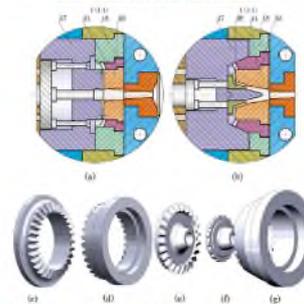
Local sections of the mold forming knot: (a), (b) - for the manufacture of fixed and movable central wheels of the 2K-H precessional gear respectively; (c), (d) - 3D views of fixed center wheel and mirror profile die; (e), (f), (g) - respectively the views of the central movable wheel, the reinforcement and the mold with mirror profile.
